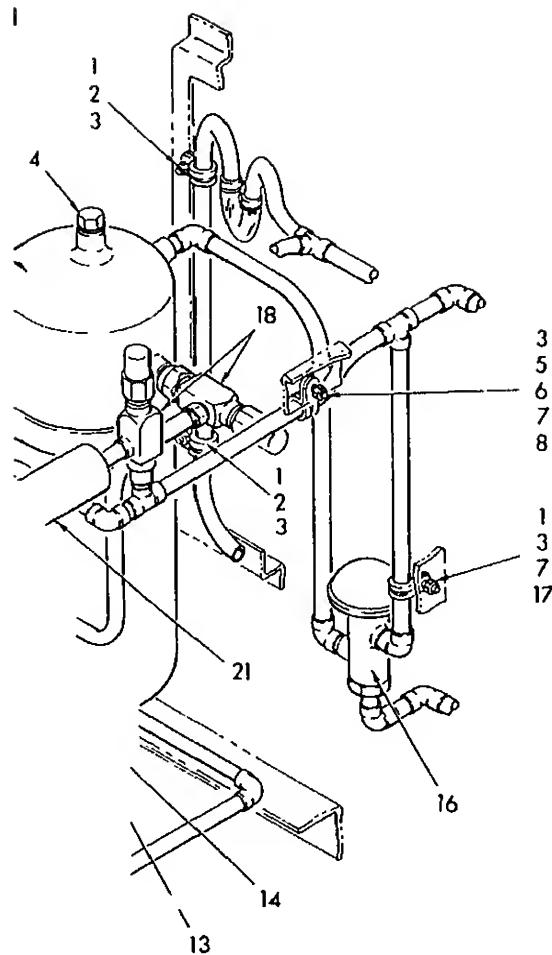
CONDENSER FAN AND MOTOR SECTION (SHEET 2 OF 2)
